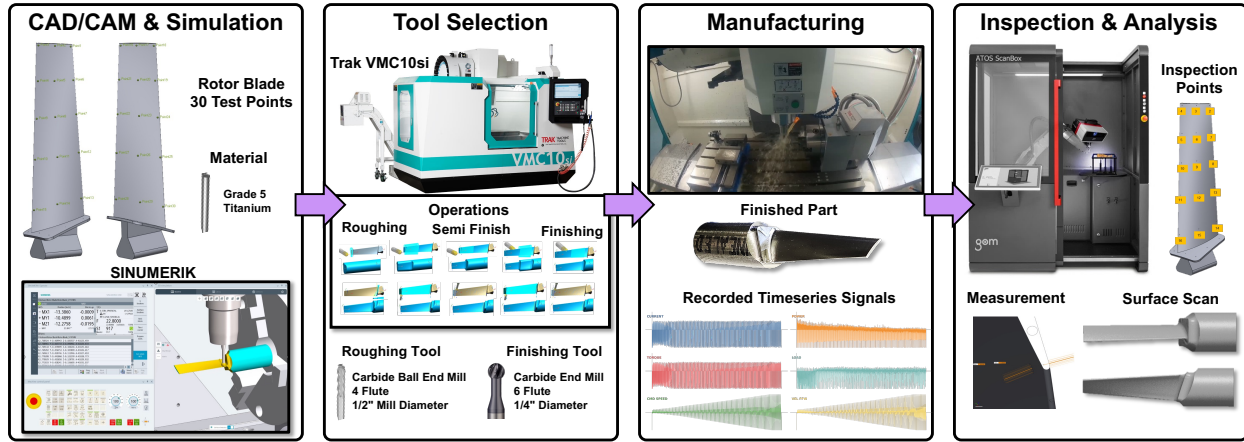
Illustration of the experimental design from part design, tool selection, manufacturing, and inspection.
